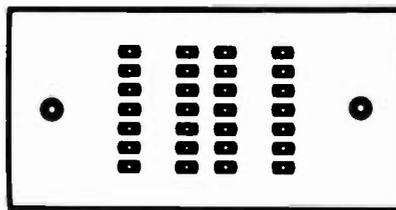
Etched board for mounting the two MAN 74 readouts on the front panel.
